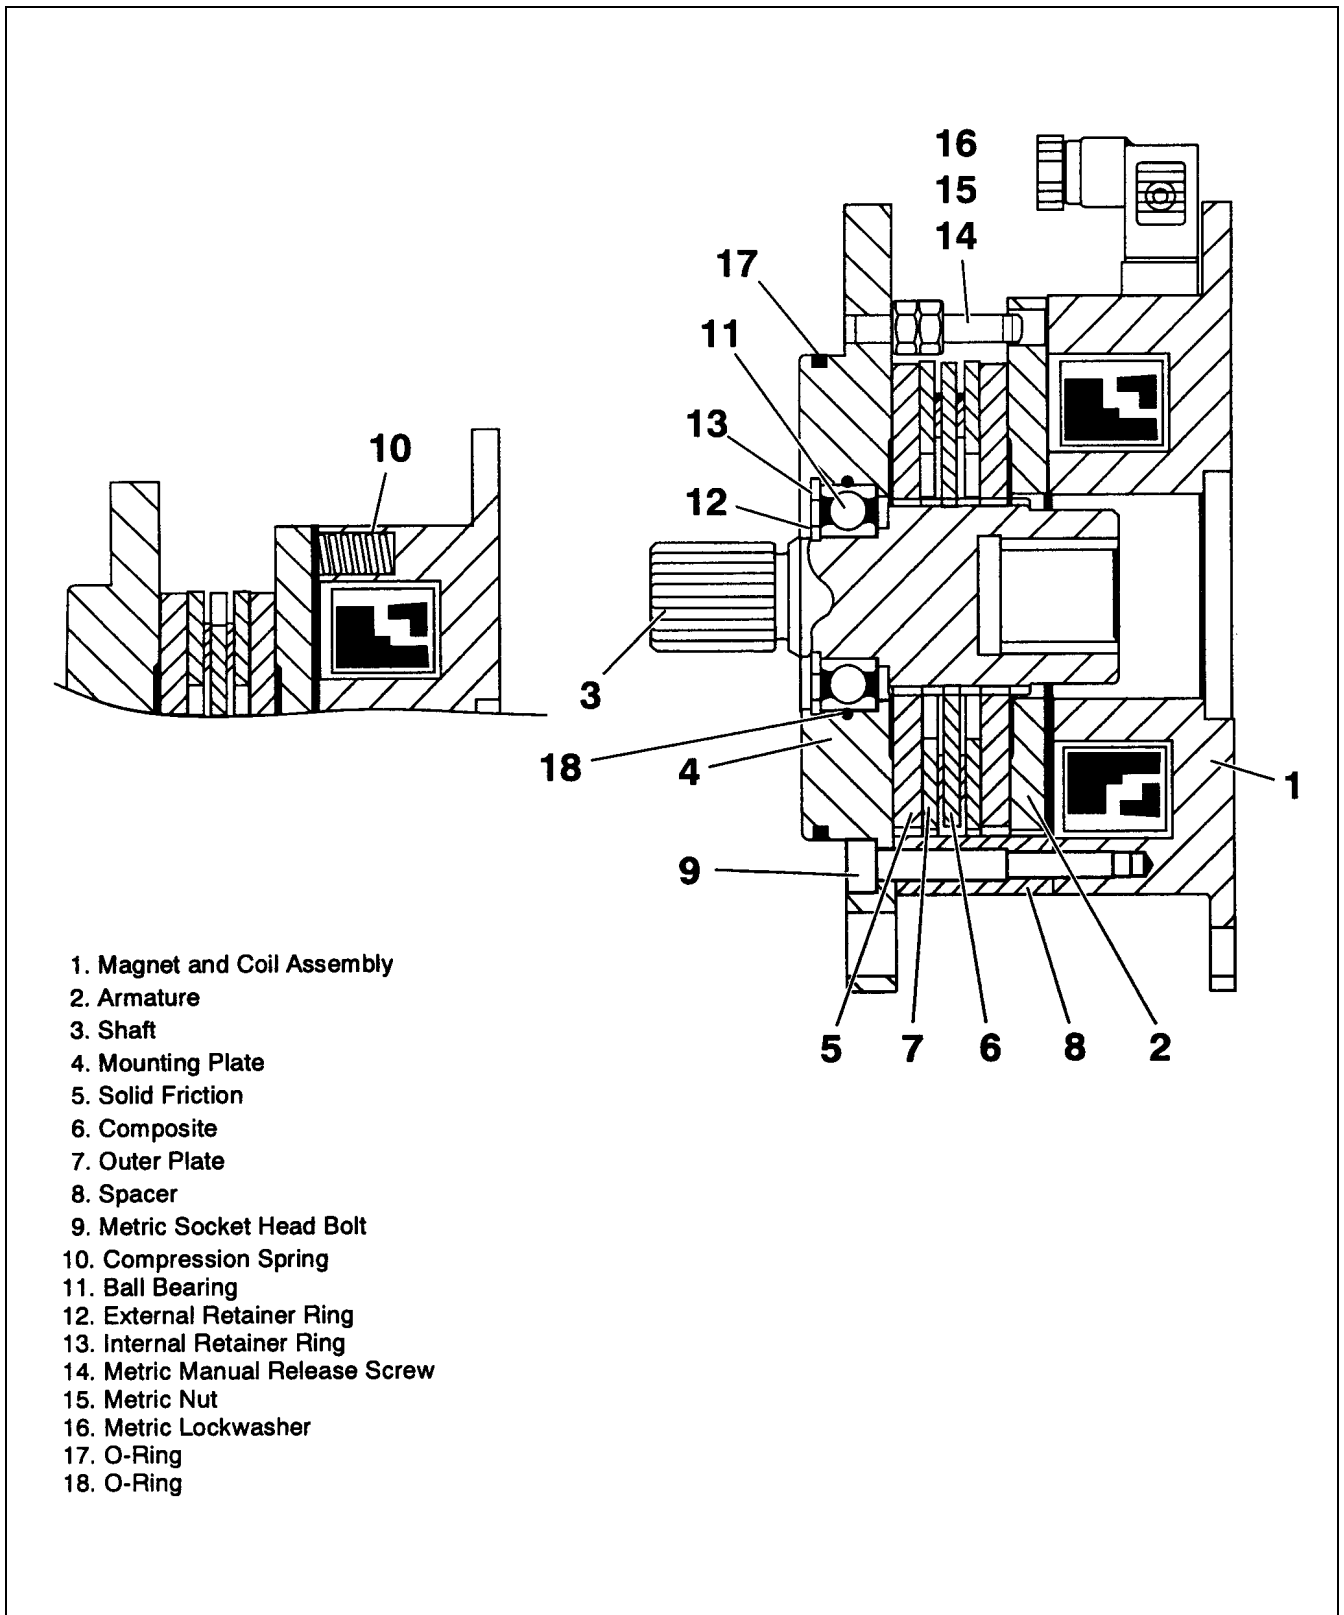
Drive Brake Assembly - 30/35/n35/40/n40/45.
